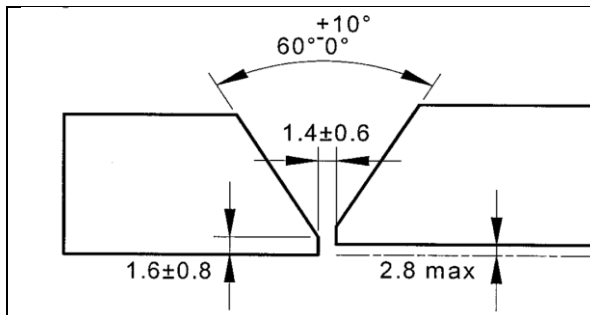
Geometric dimensions and tolerances of a typical single-V butt weld preparation.
